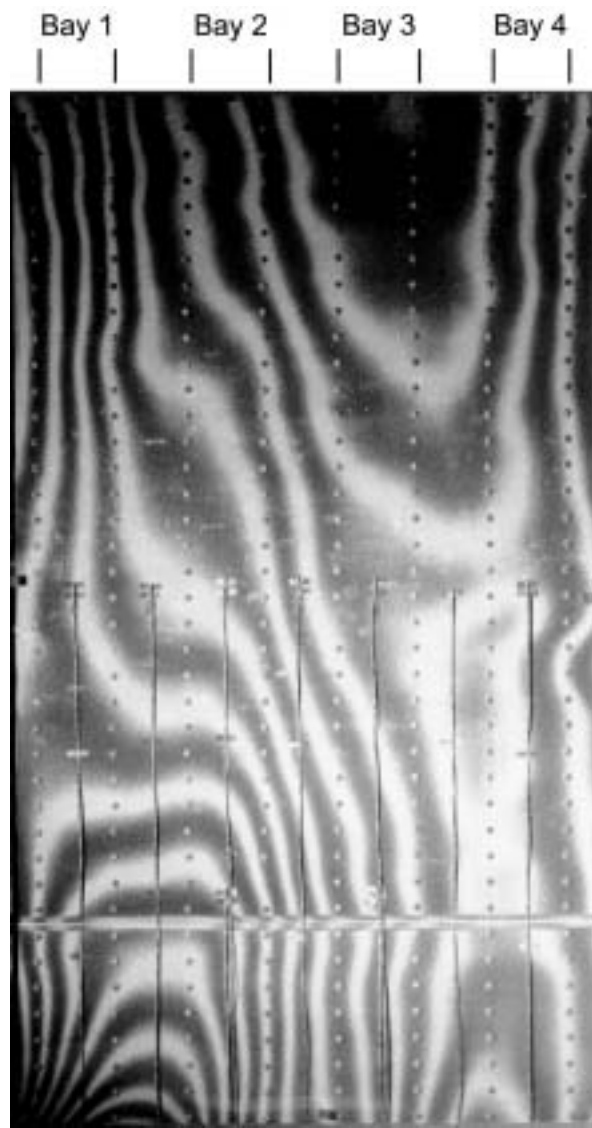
Out-of-plane displacement for the friction stir welded panel.
